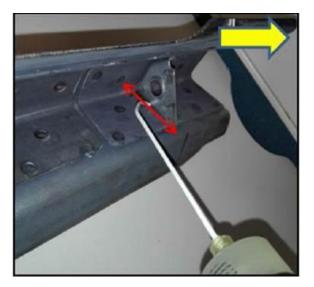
Cut-away illustration of the internal area for the Krytox™ application on front bracket.
